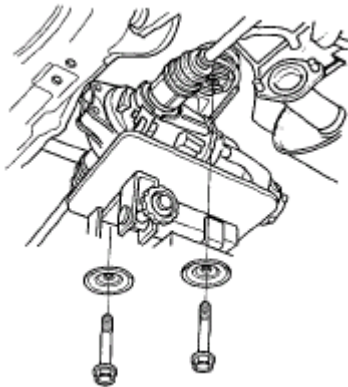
Identifying Rear Differential Damper (M/T Model) And Mounting Bracket
